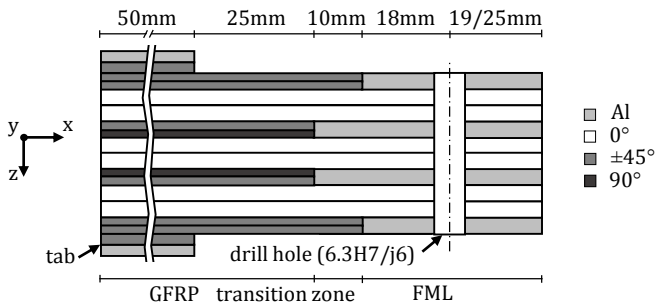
Specimen design for the bearing response of FMLs with stepped lap metal sheets.
